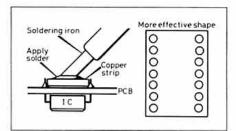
Using a piece of copper to unsolder all IC pins at once. The shape with the holes fitting over the pins is more effective.
